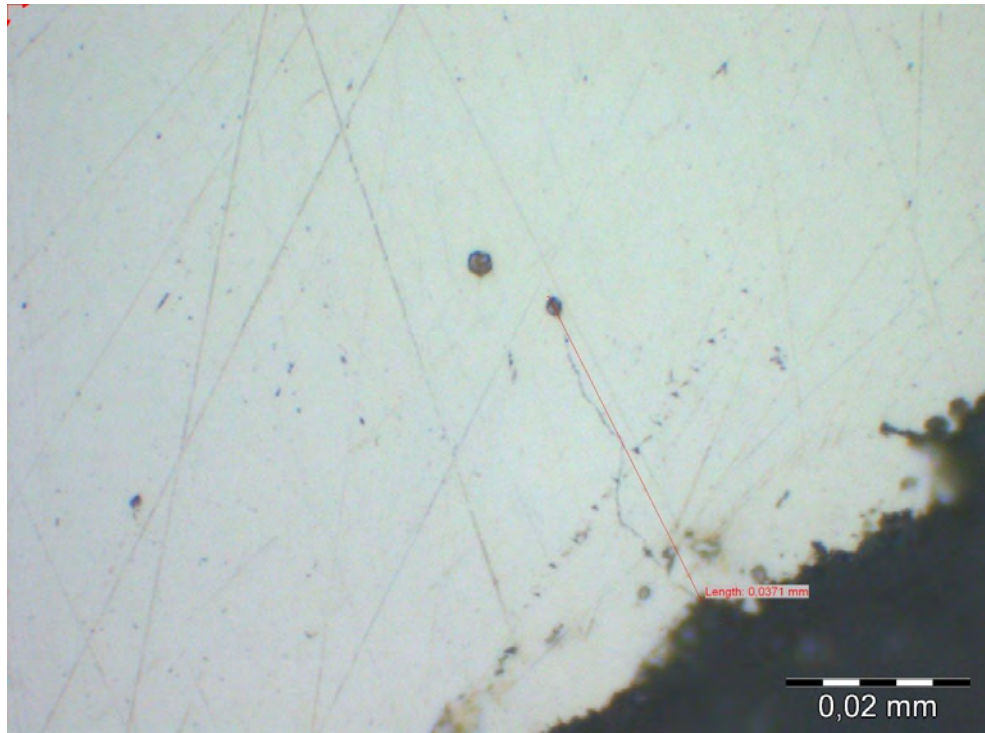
Crack at segment A, fourth ridge on barrel no. SFK 0120-A
